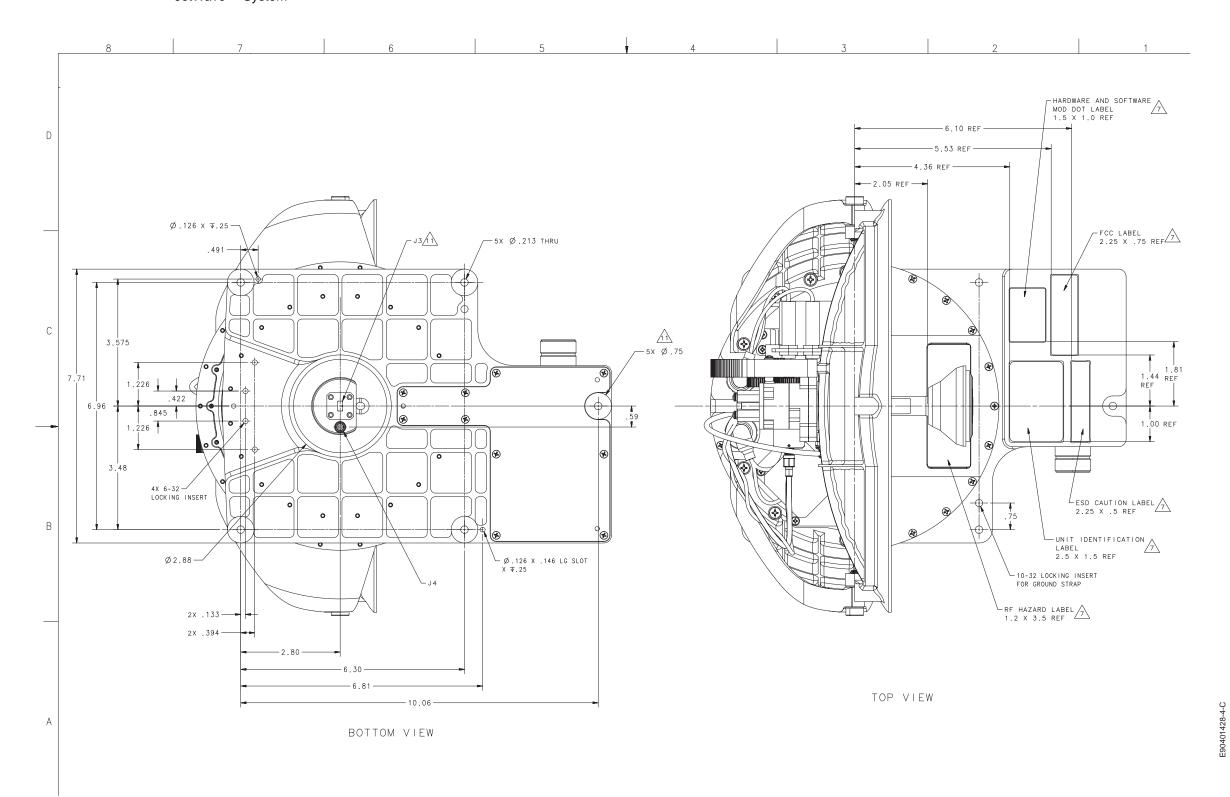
TMA Outline and Installation Drawing (Sheet 4 of 4)
